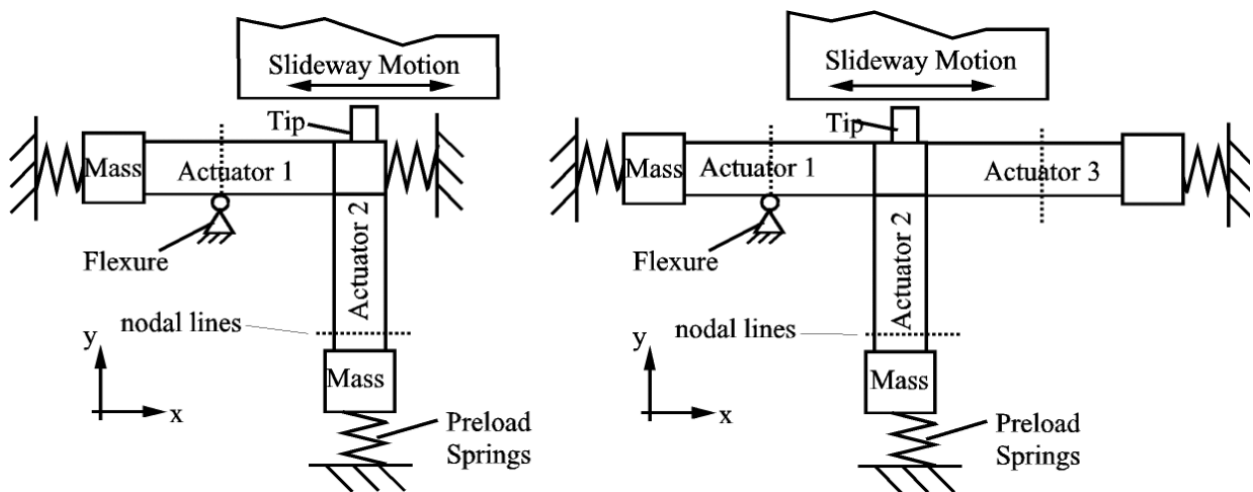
L-shaped Prototype (left) and T-shaped Prototype (right).
